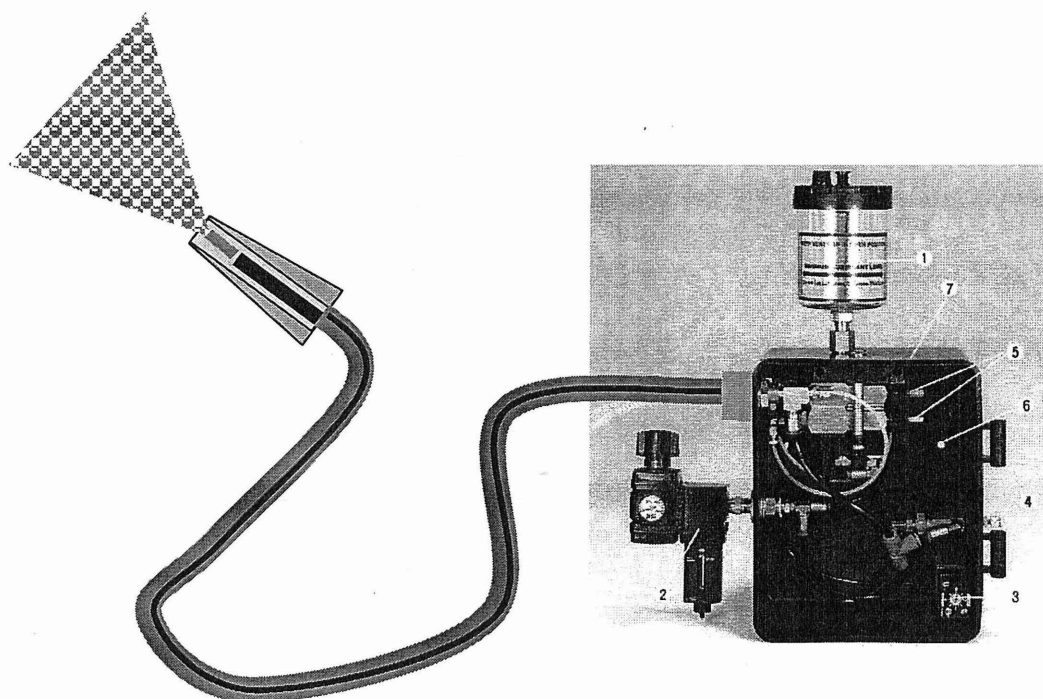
Oil mist supply machine BLUEBE FK-33
